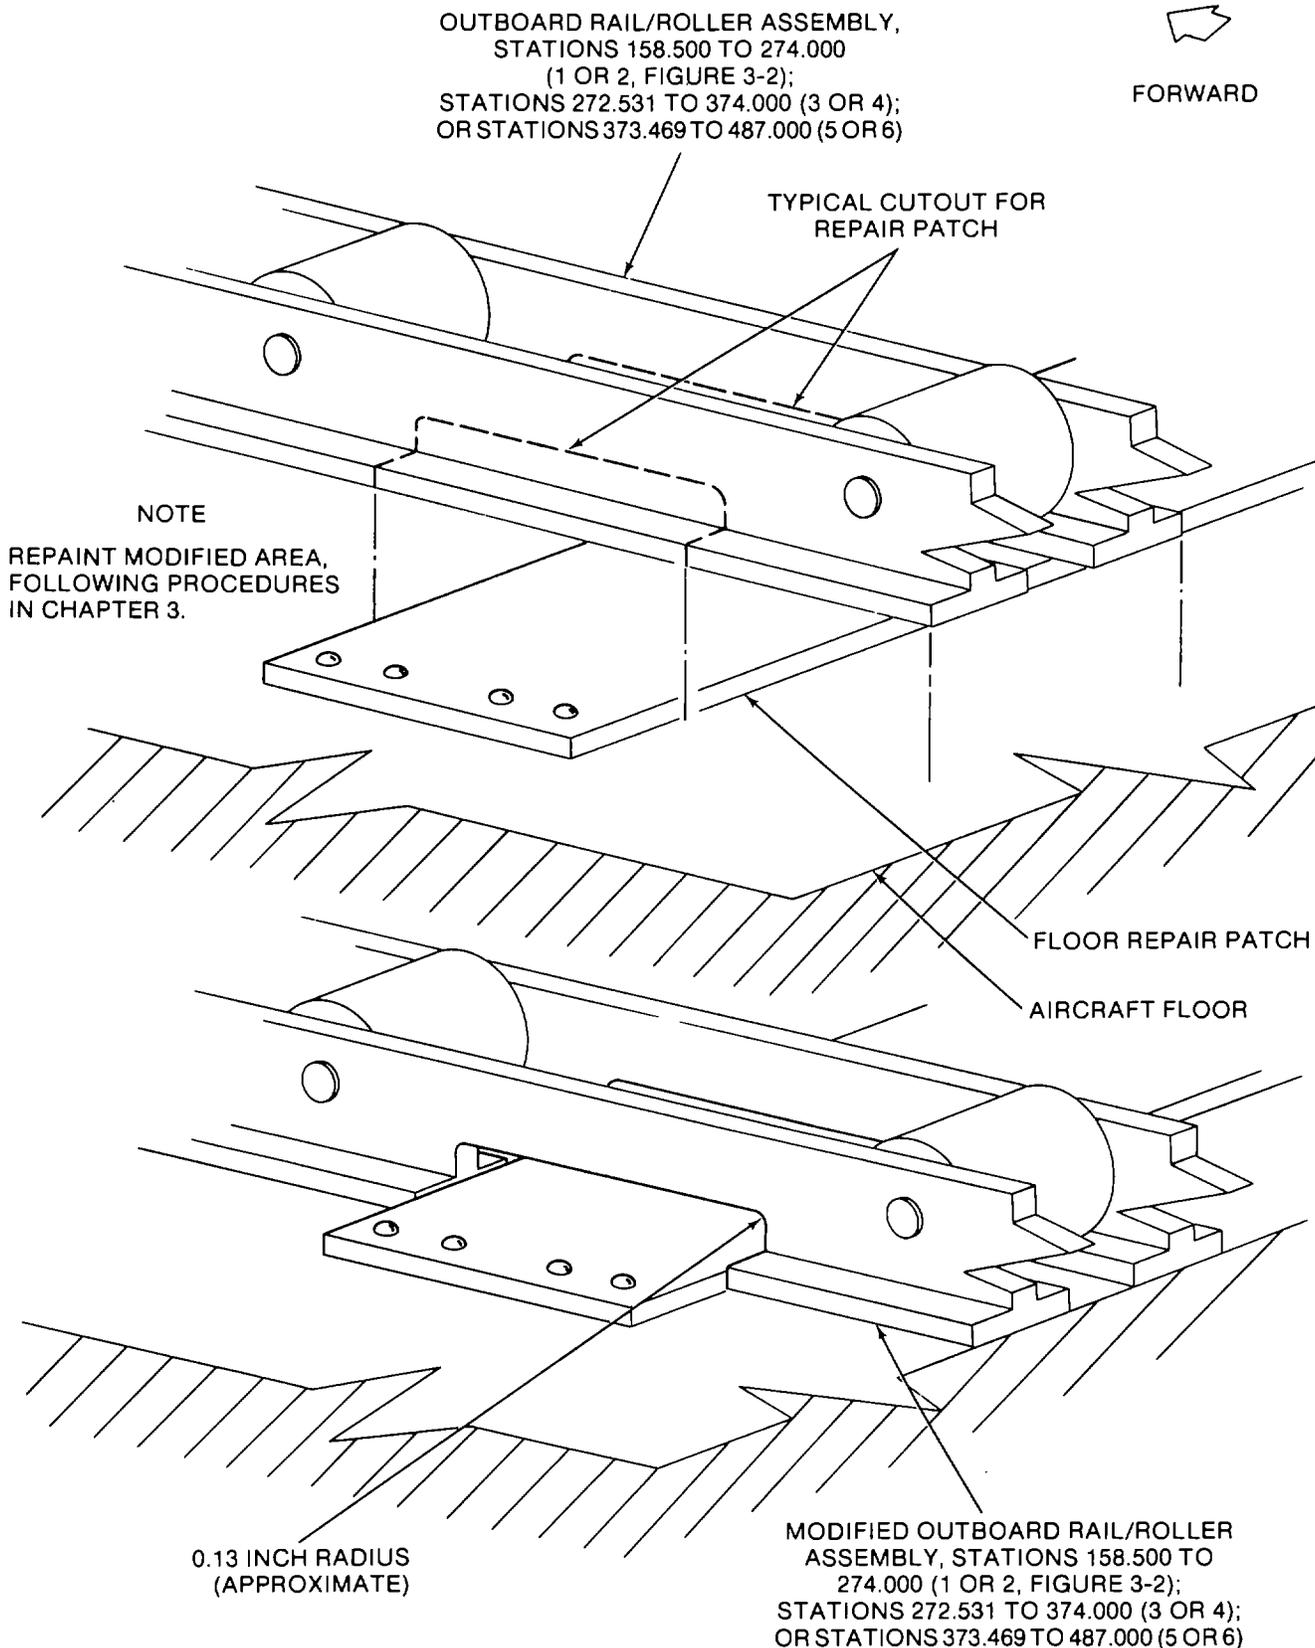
Rail Modifications Required for Floor Repair Patches
